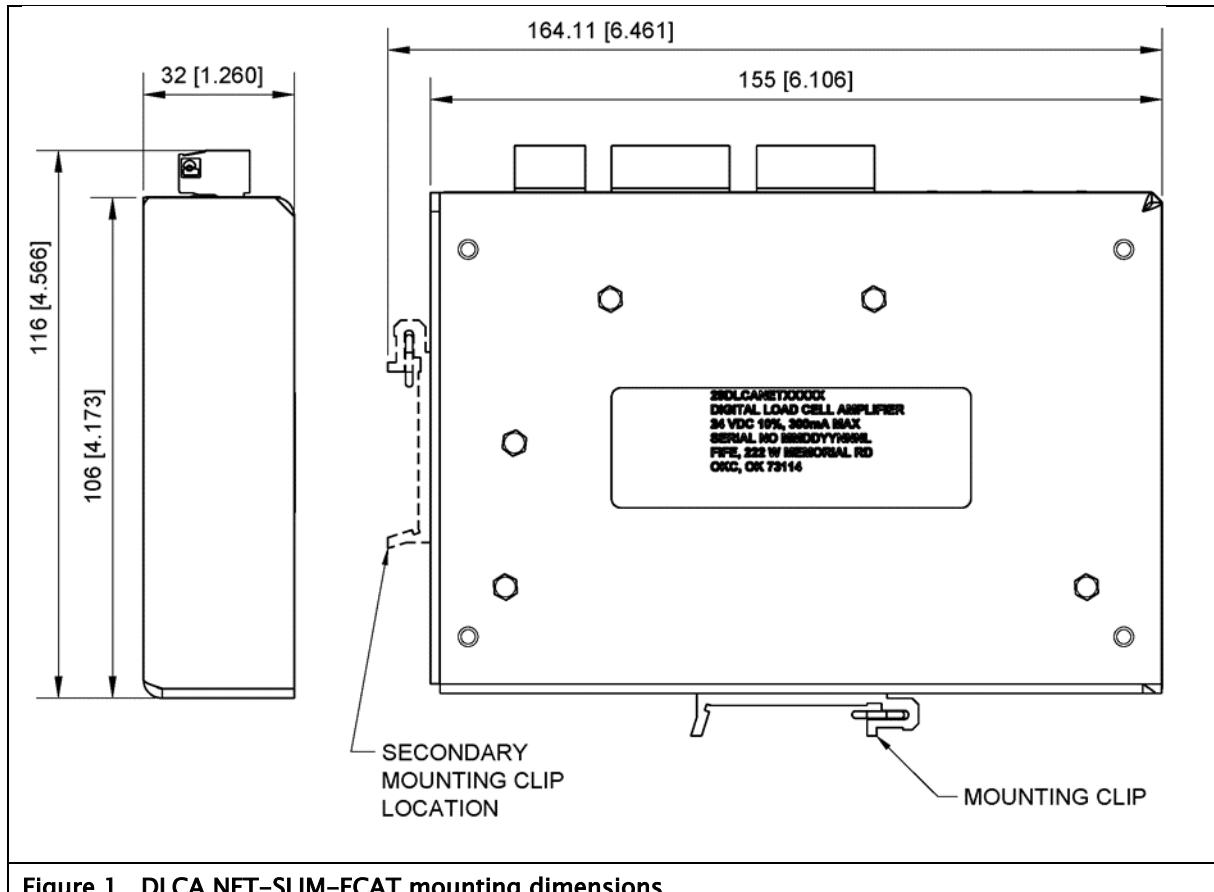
DLCA NET-SLIM-ECAT mounting dimensions
